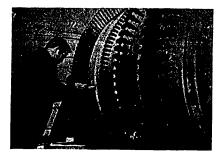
Blading of the low-pressure rotor of the K-1200-240-3 turbine.
